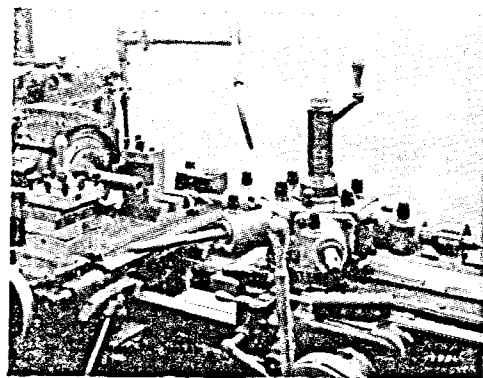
Tooling arrangement on a Herbert No. 4 Senior Capstan Lathe for producing Stay & Rivet bushes from reeled mild-steel bar.
